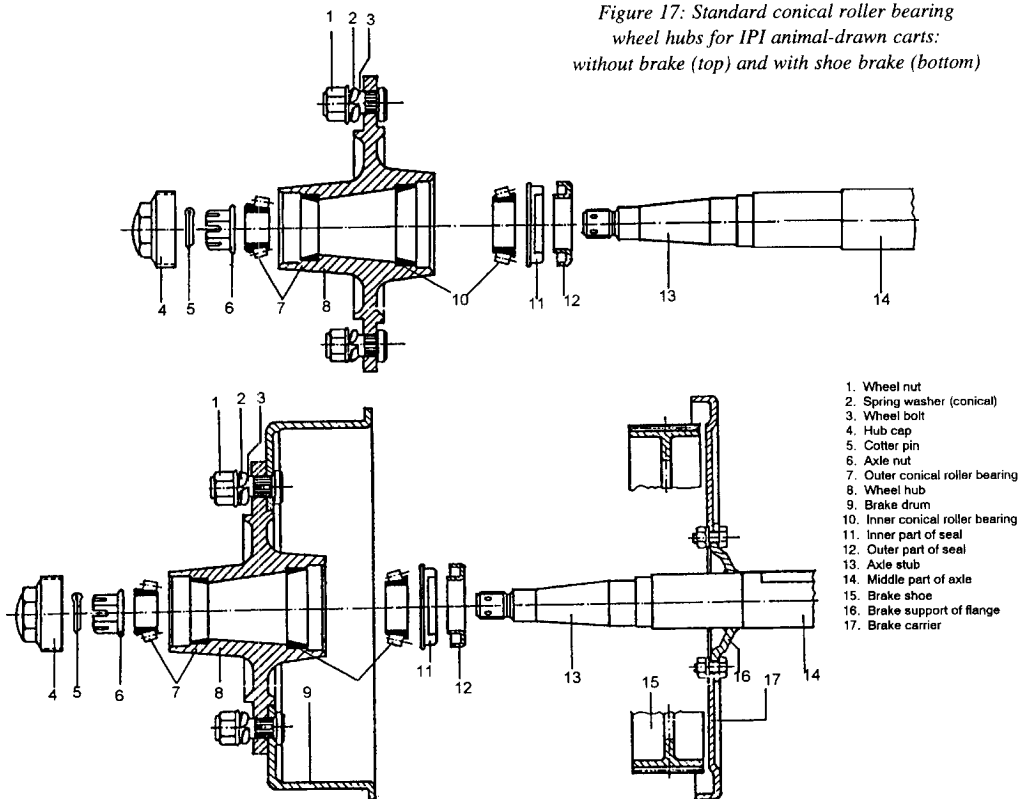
Standard conical roller bearing wheel hubs for IPI animal-drawn carts: without brake (top) and with shoe brake (bottom)
